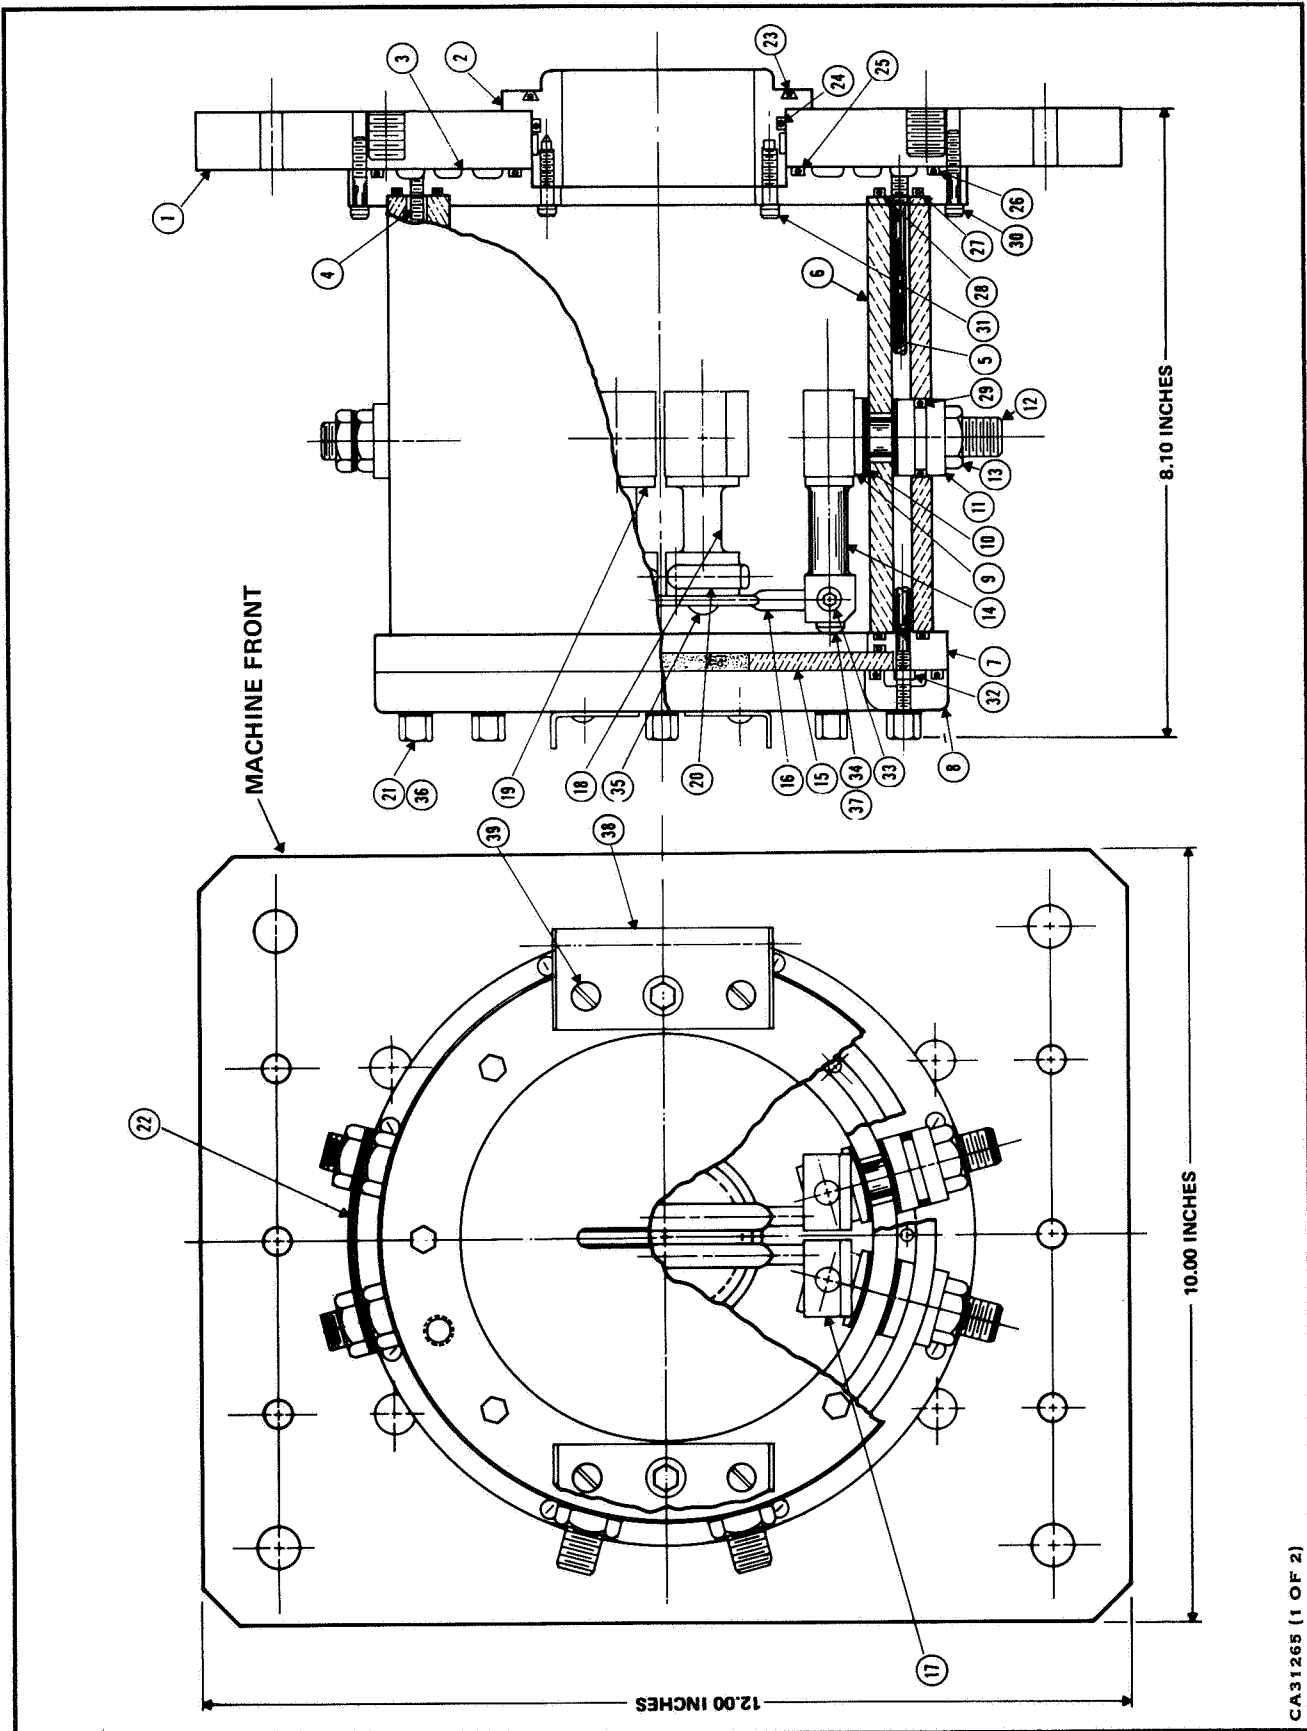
Cavity Assembly - Ribbon Puller (Sheet 1 of 2)
